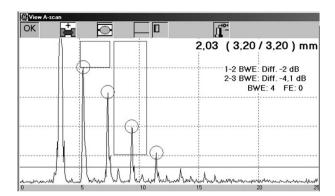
The configuration of ultrasonic impulses obtained during the implementation of tests for a properly performed weld joint.
